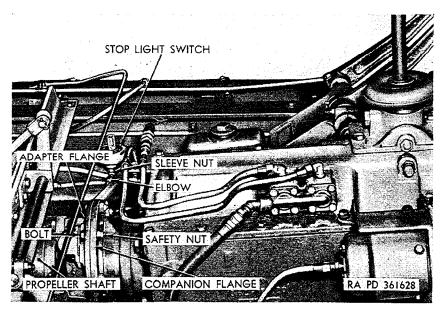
View of right rear section of transmission and transmission-totransfer propeller shaft.
